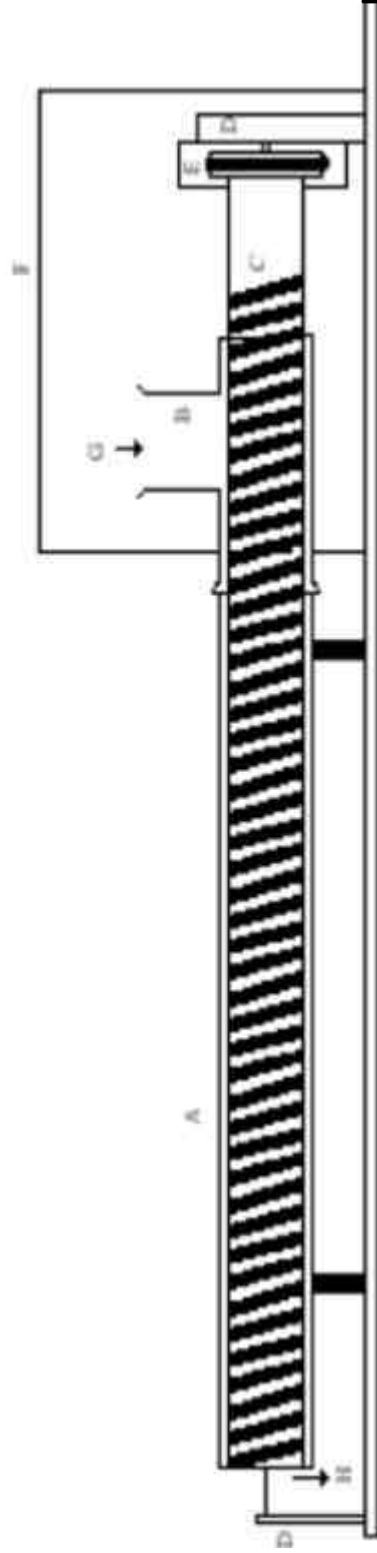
Schematic drawing of sesame dehuller; (A) Pvc pipe, (B) T-shaped pipe, (C) Rotating spiral shaft, (D) Rim
